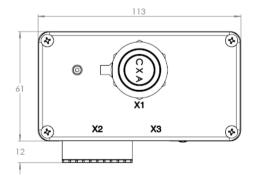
Patch Board Mk2 Dimensions (mm)
